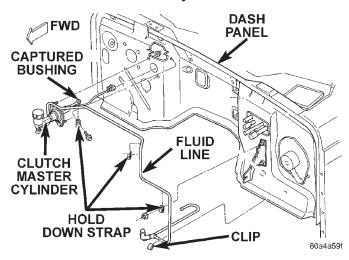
Right Hand Drive Clutch Master Cylinder INSTALLATION
